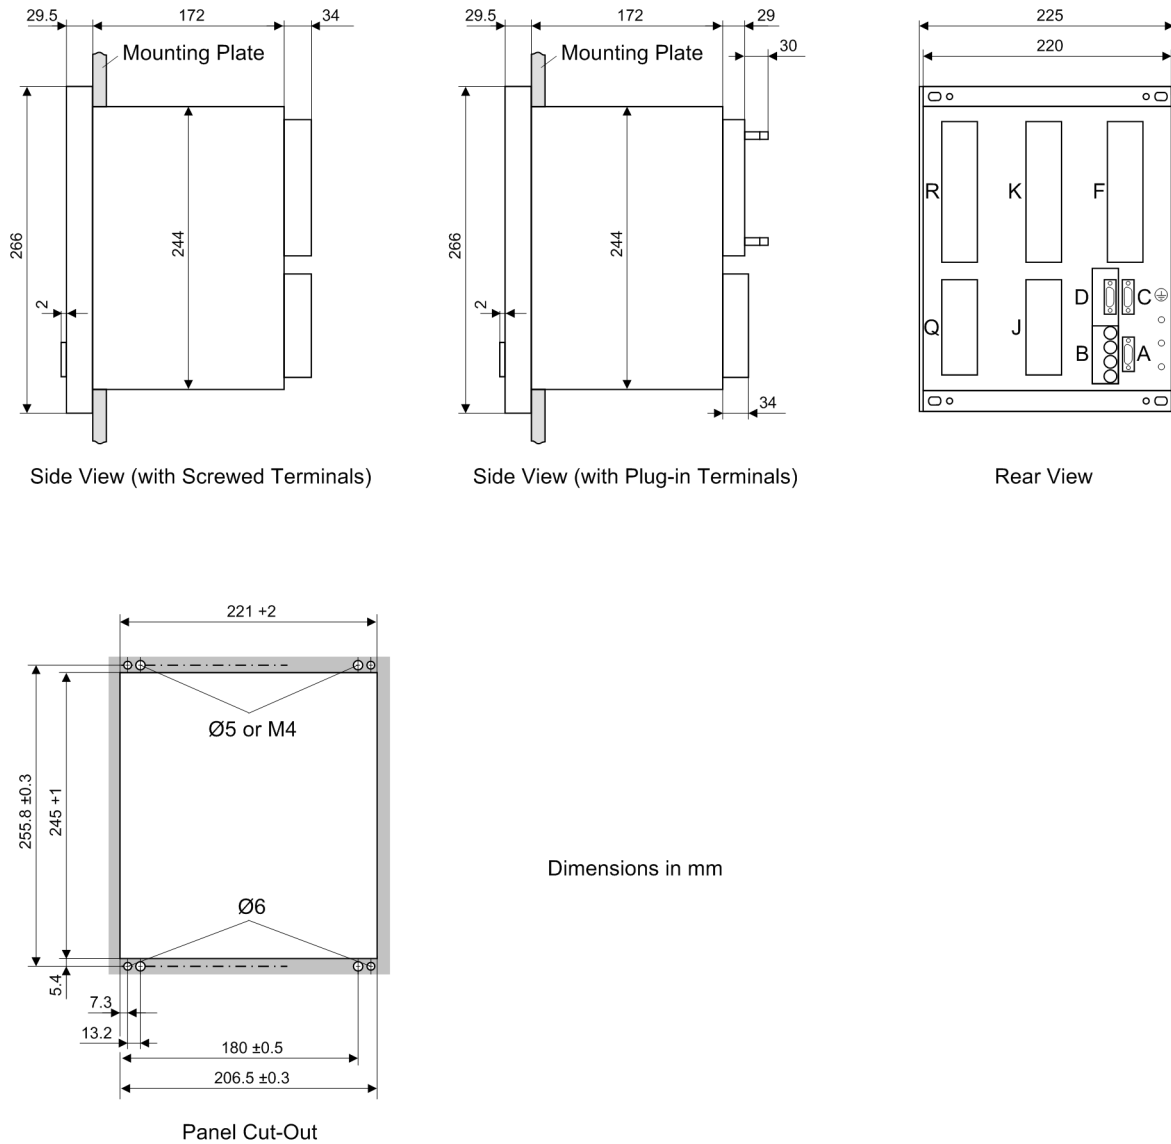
Dimensions of a 7UM621 or a 7UM623 for Panel Flush Mounting or Cubicle Installation (size 1/2)
